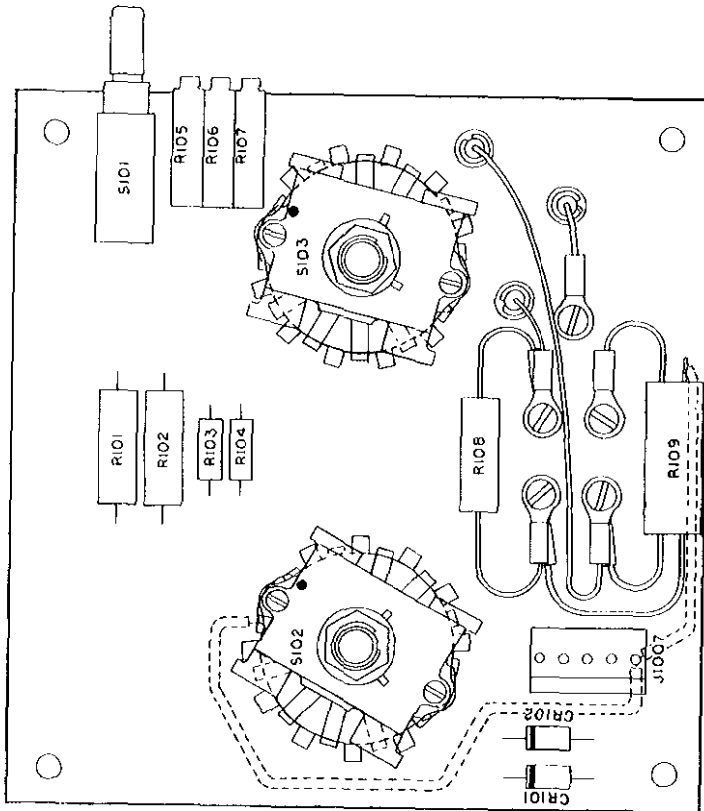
Model 262, Component Location Drawing, Dwg. No. 262-100
